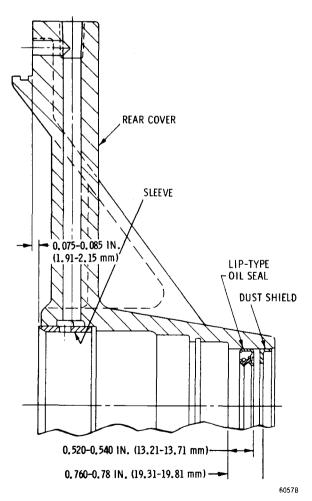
Oil and dust shield installation (TT with converter-driven PTO)
